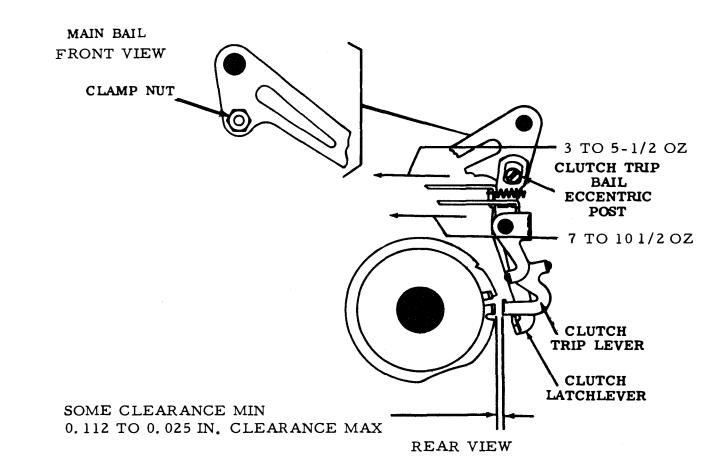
Clutch Trip Lever, Clutch Trip Lever Spring, and Clutch Latchlever Spring
